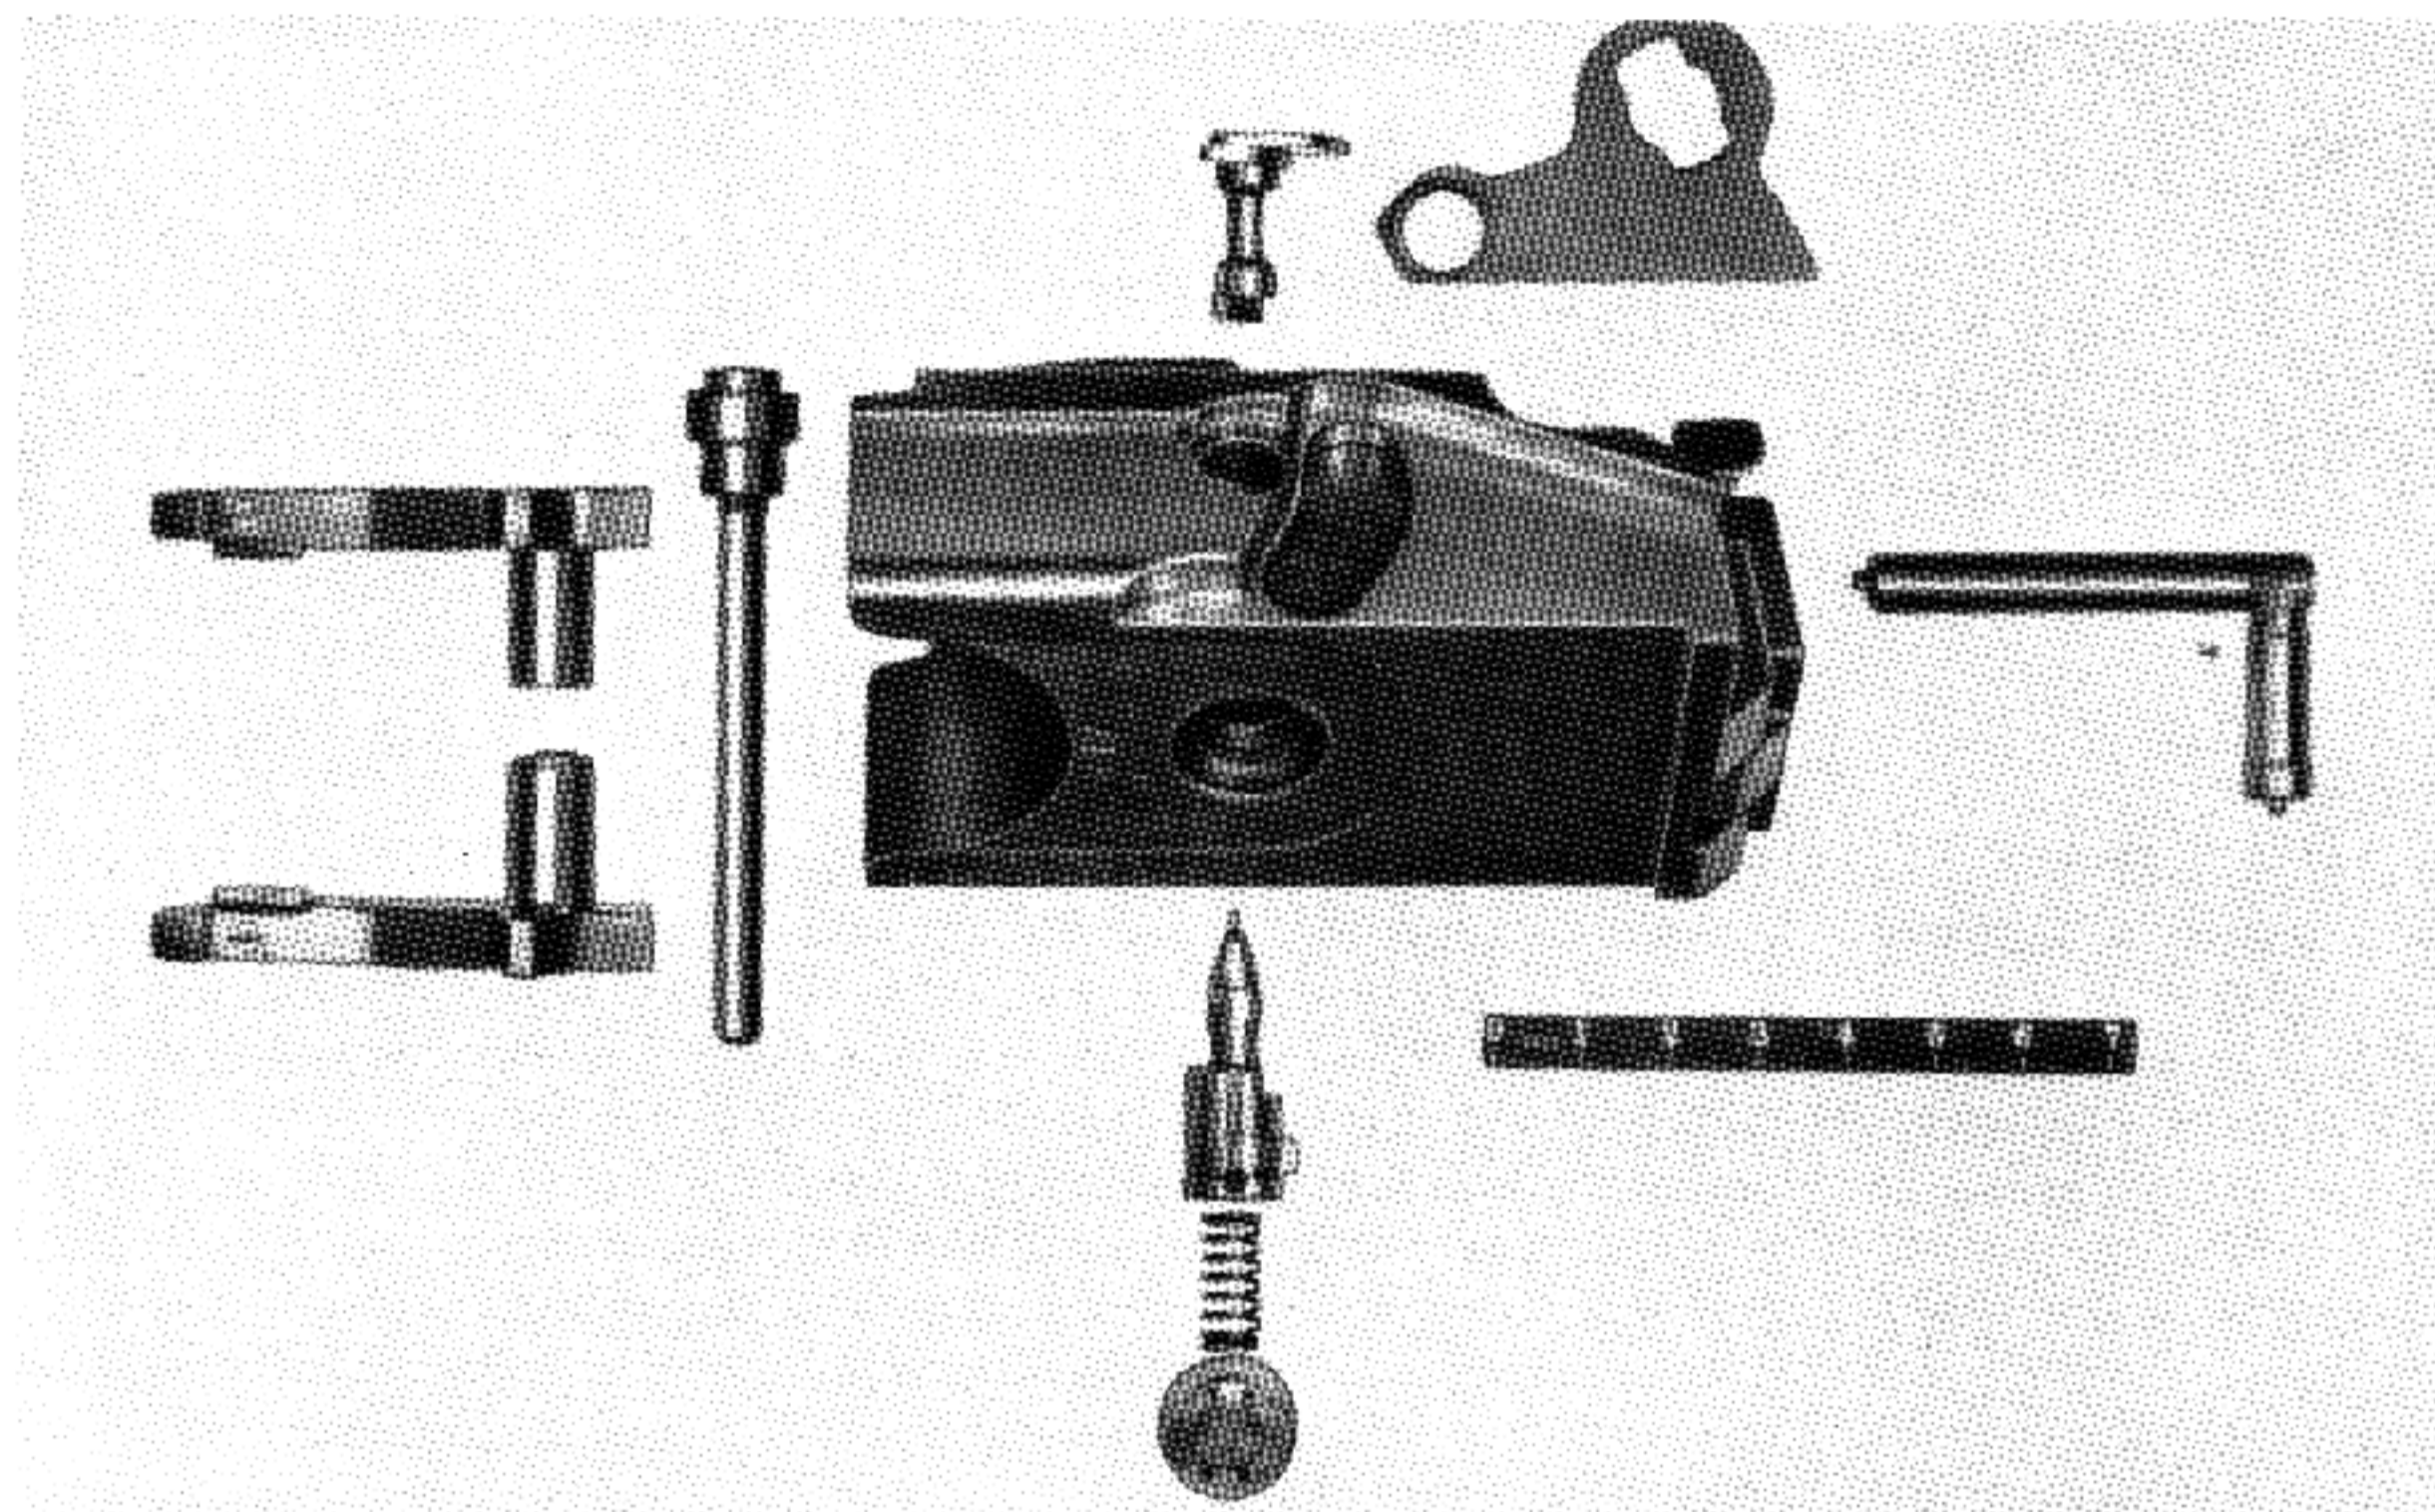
Breechlock of 5-cm BK Automatic Aircraft Gun. Disassembled view.
